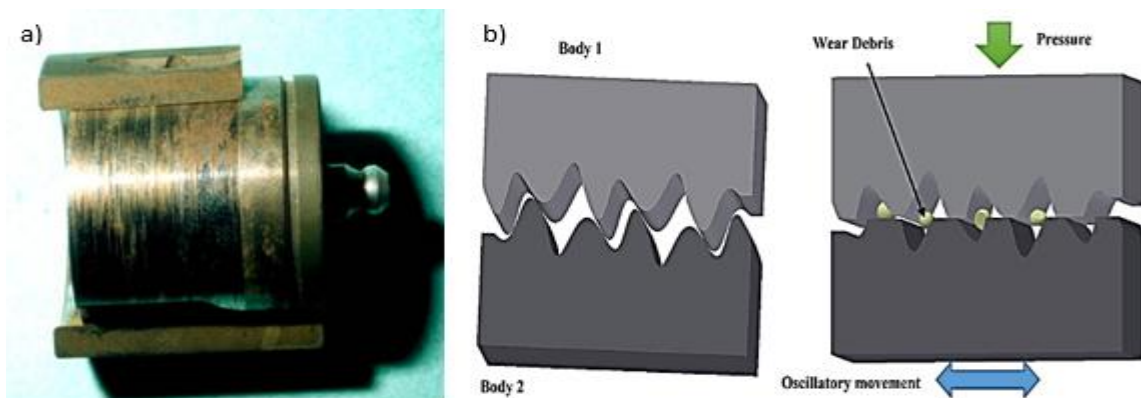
(a) Fretting corrosion of steel [22] and (b) Microscopic surface asperities of two bodies pressure and oscillatory movement form wear debris [23].
